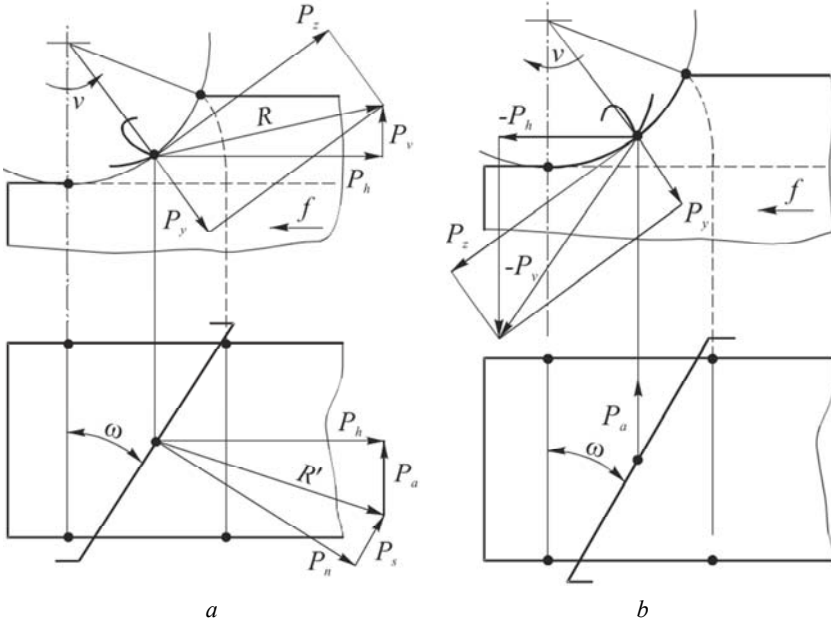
Components of the cutting force R on a helical tooth of a plain milling cutter: a – conventional milling; b – climb milling
